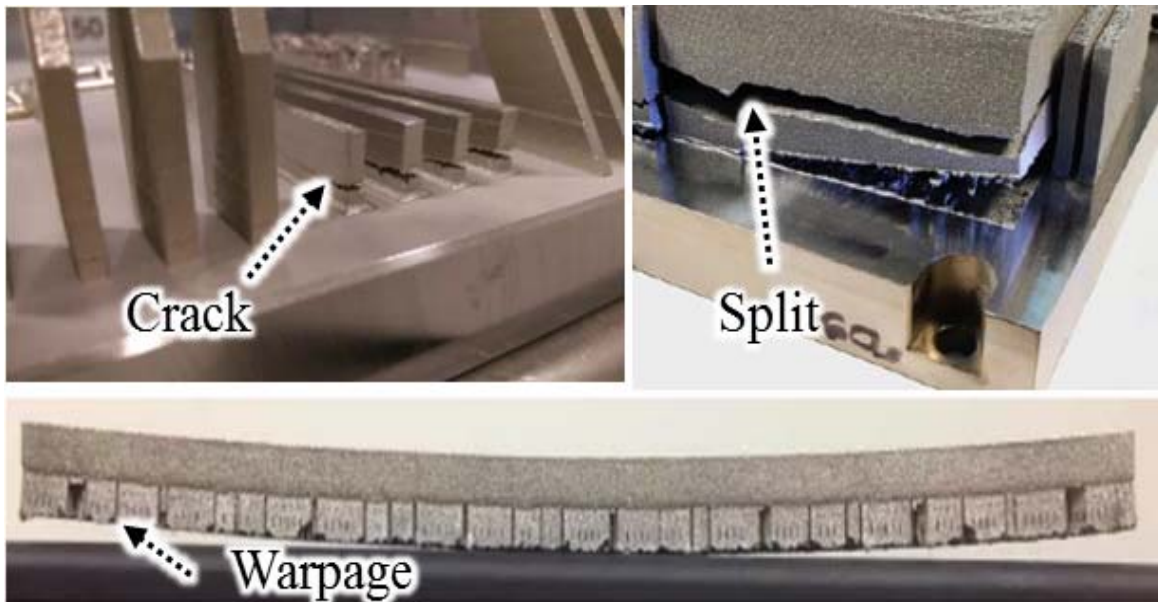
Defects of fabricated parts by the metal AM process²⁸⁾
